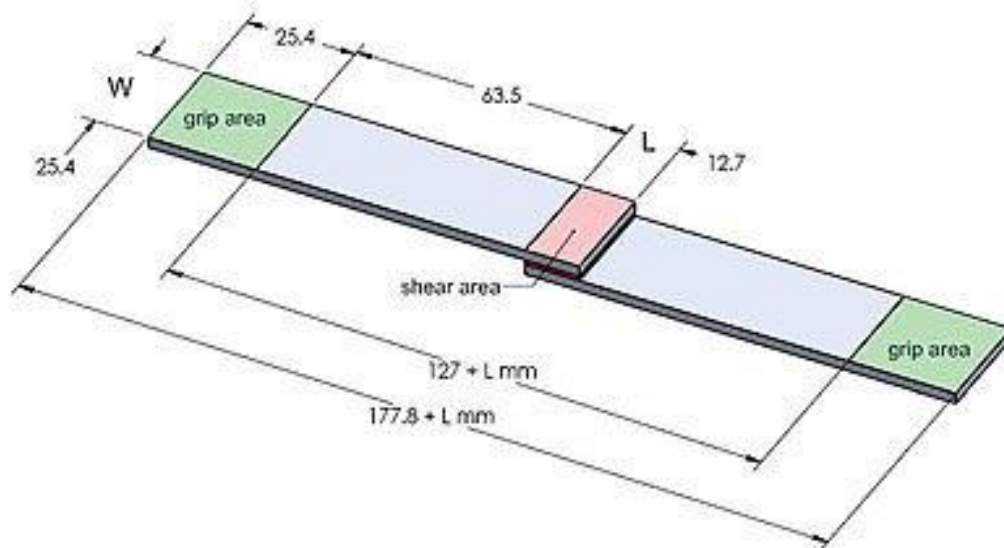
ASTM D3163 – 01 - Single Lap Joint standard
